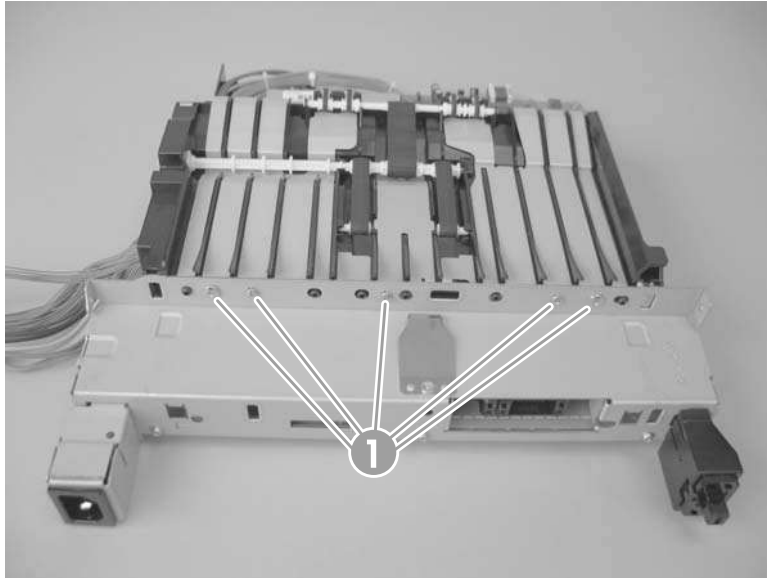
Remove the high-voltage power-supply assembly (8 of 8)
